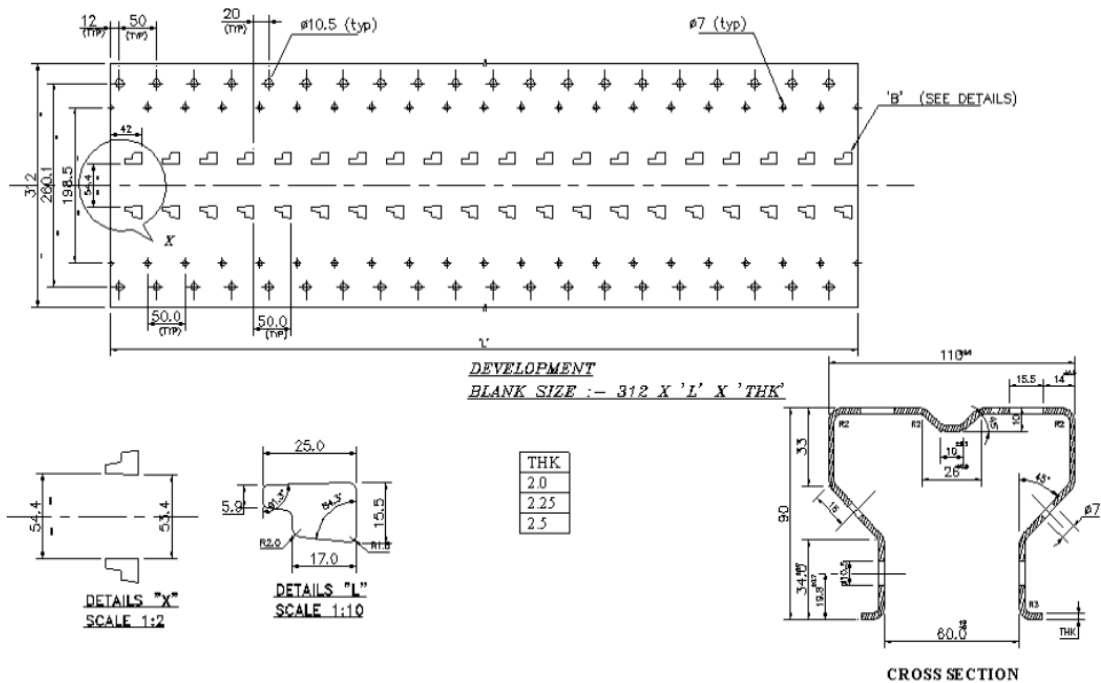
Heavy weight (HW) column upright section as per Sangle et al. [9]
